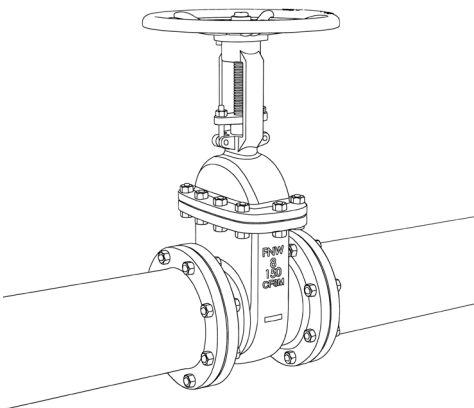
XX - 46XX - 47XX - 55XX - 56XX - 57XX FLANGED GATE, GLOBE & CHECK VALVES
